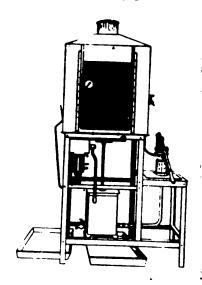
General View of Installation for Hydraulic Testing of Fuel Nozzles
